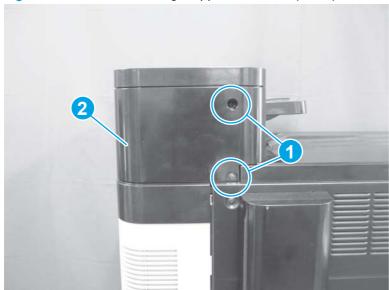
Remove the scanner front cover (M880; 8 of 8)
